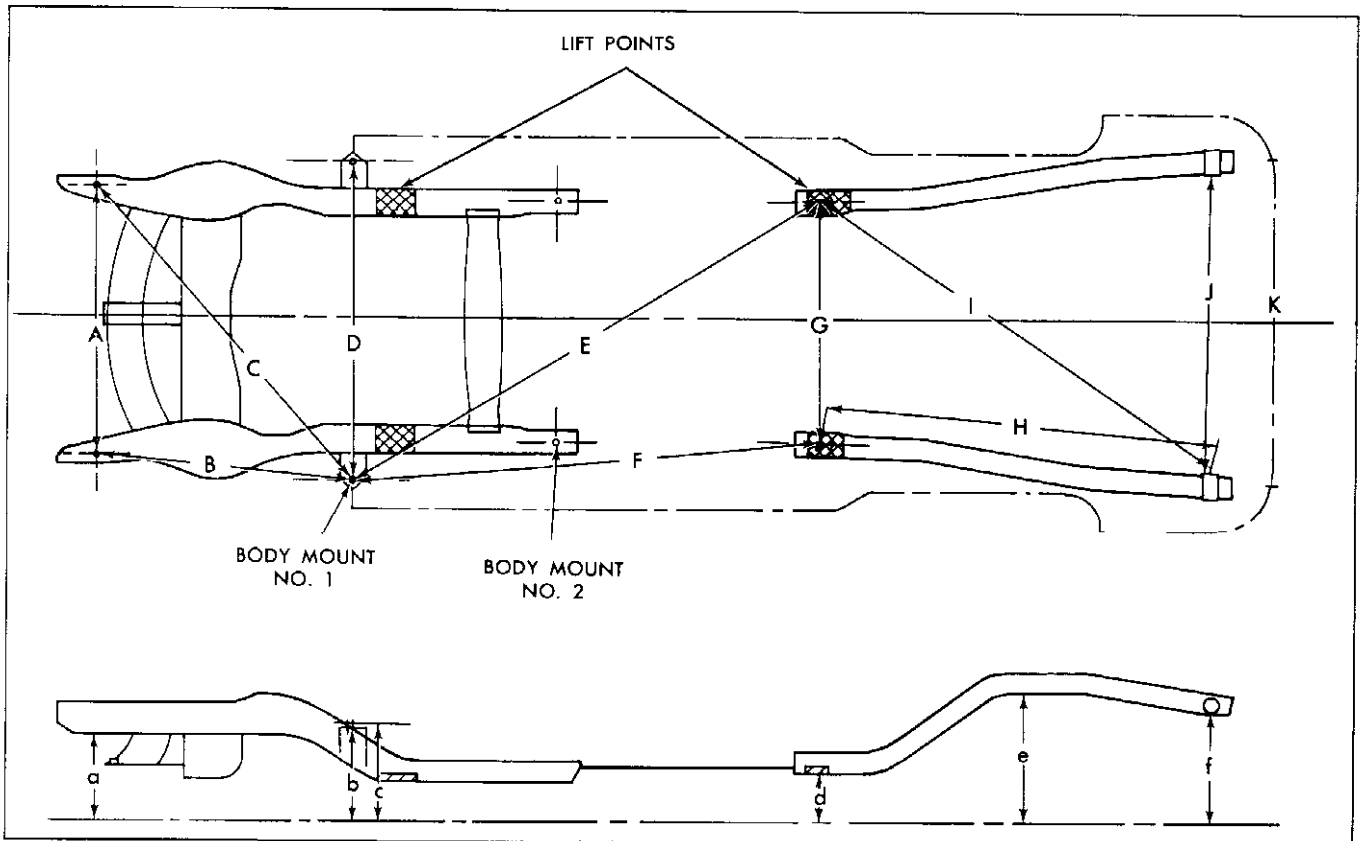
Checking Dimensions, Lift Points and Body Bolt Locations
